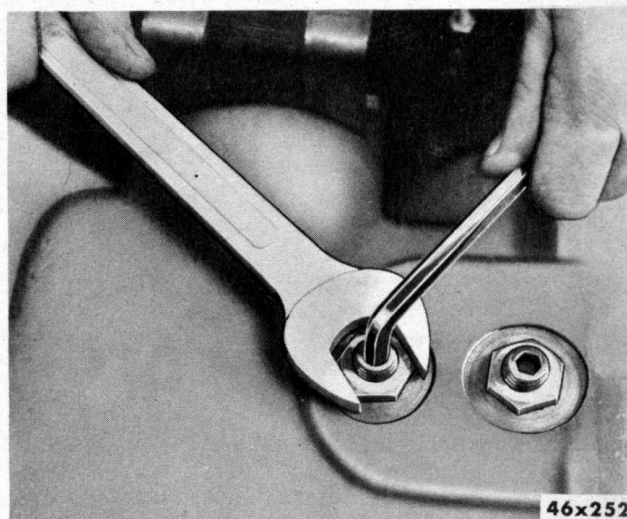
Adjusting Shift Collar (Front Mounted Shift Unit)
